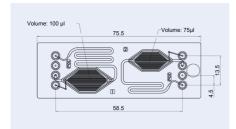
Schematic drawing of membrane chip Fluidic 1113 with Mini Luer interfaces
